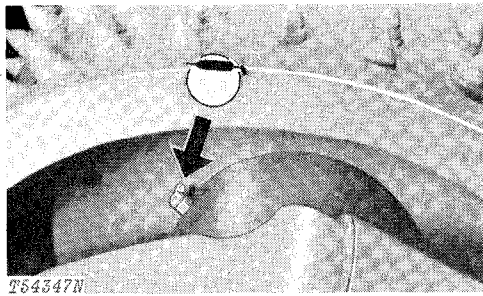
Feed Roll Final Drive Shaft Upper Bearing (2 Points)
